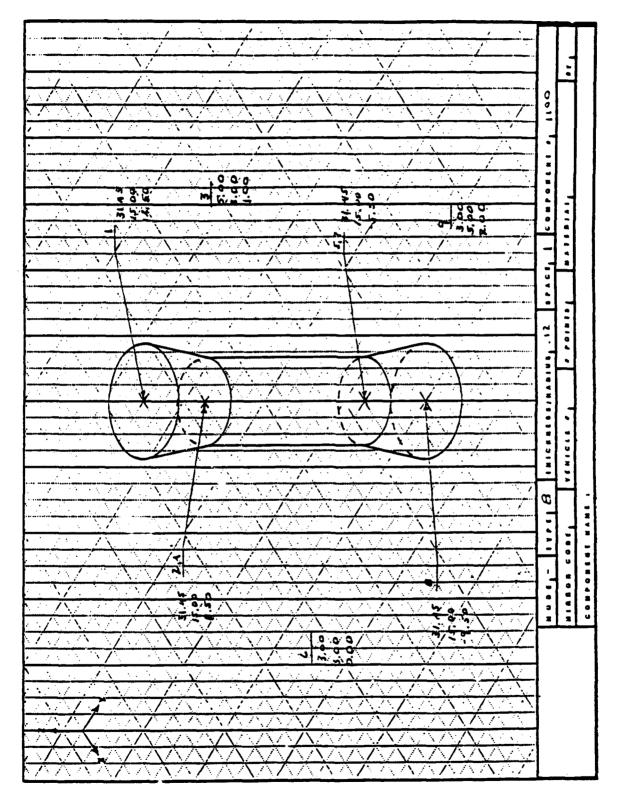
Sketch of Sealed Tank Formed by Two Truncated Cones and a Cylinder
